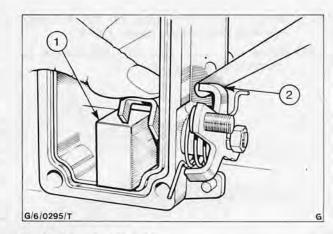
Adjust Fuel Shut-Off 1. Spacer
